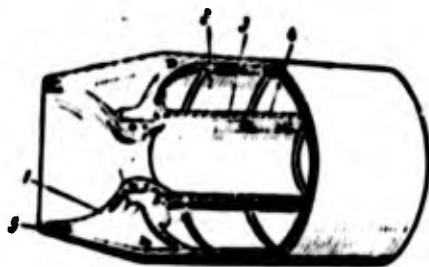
Liquid propellant rocket engine with combustion chamber, located inside the fuel tank: 1 - wall of nozzle; 2 - fuel tank; 3 - casing; 4 - inner wall of combustion chamber; 5 - outer body of tank.
